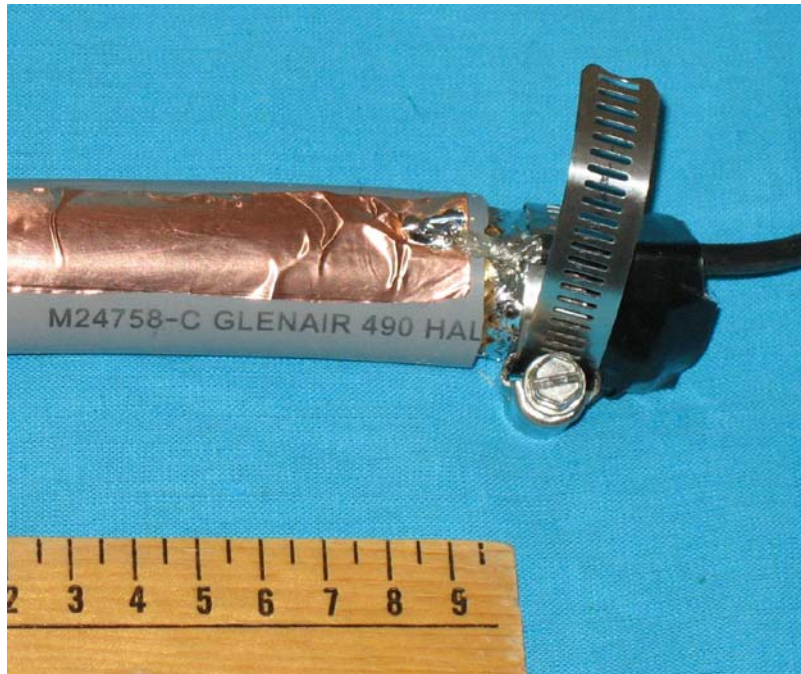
Drive End of Glenair M24758 Conduit, with IEC 600096-1, Amendment 2 Test Apparatus Installed.
